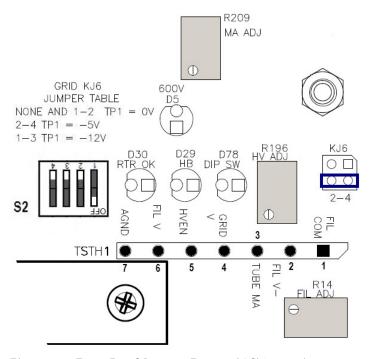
Front Panel Inverter Drawer (ASY-07006)
